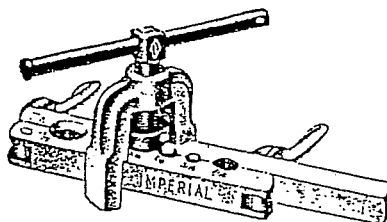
Slide yoke over end of die holder into position, and turn compressor screw down firmly. The result is a precision 45° flare.
